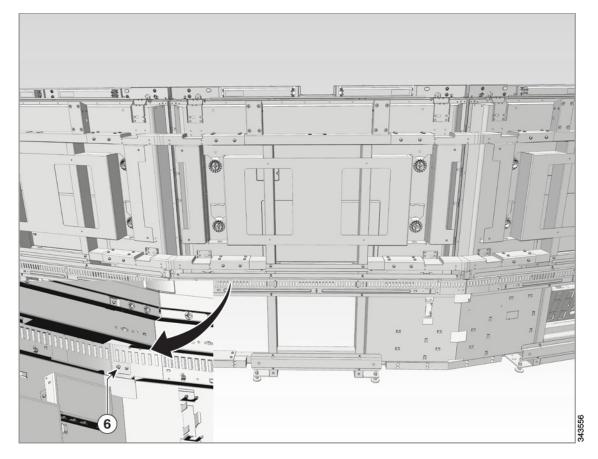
Installing the Rear Facade (Top) Brackets (3 of 3)—Installing the Center Rear Facade Bracket
